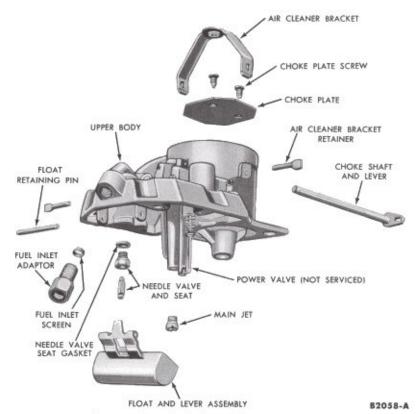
Carburetor Upper Body Assembly— Manual Choke
